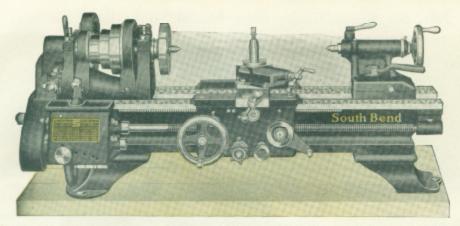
Manufacturing Small Duplicate Parts on the 9-inch Junior Lathe.
